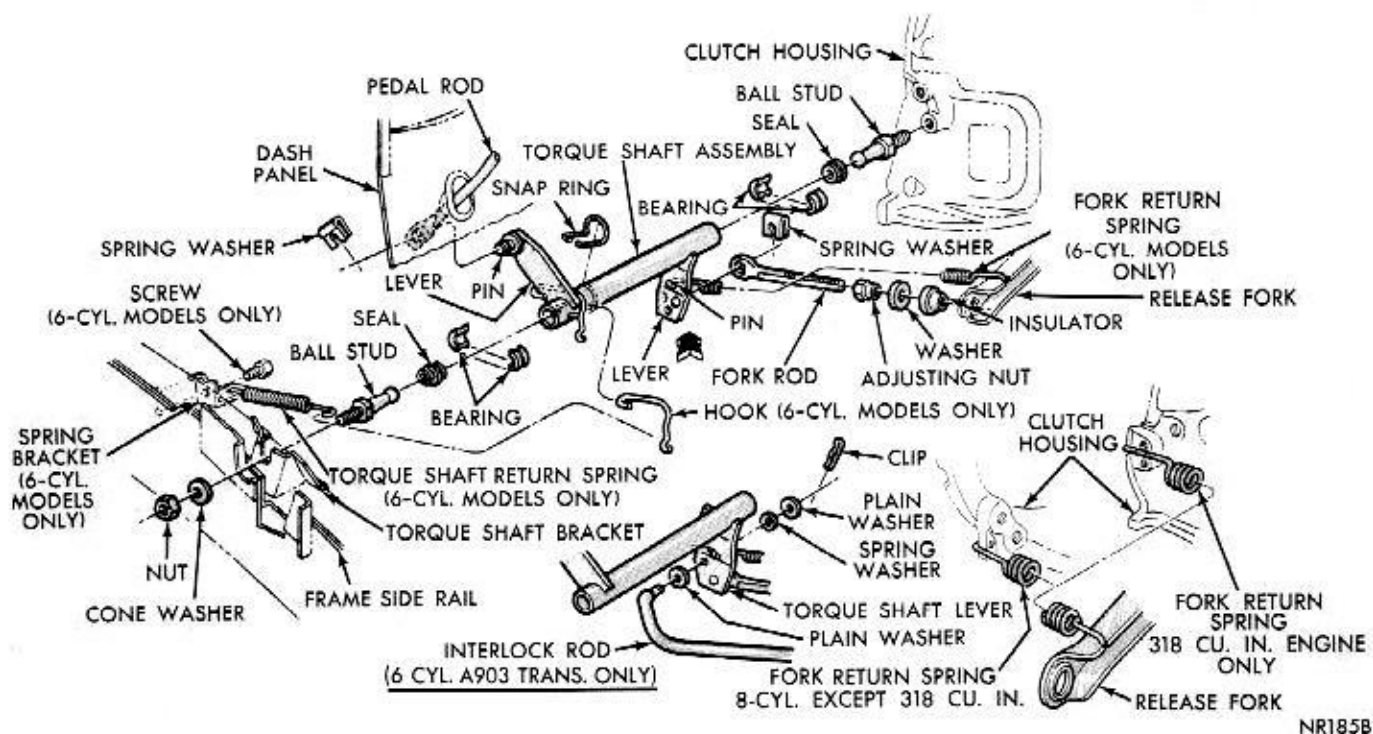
Torque Shaft and Linkage (Coronet-Charger)
